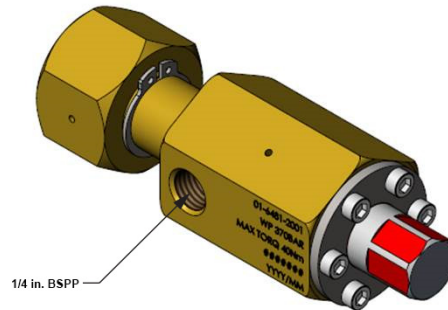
Fill Adapter, P/N 38-406000-001 for Natura IGS System Cylinder Valve
